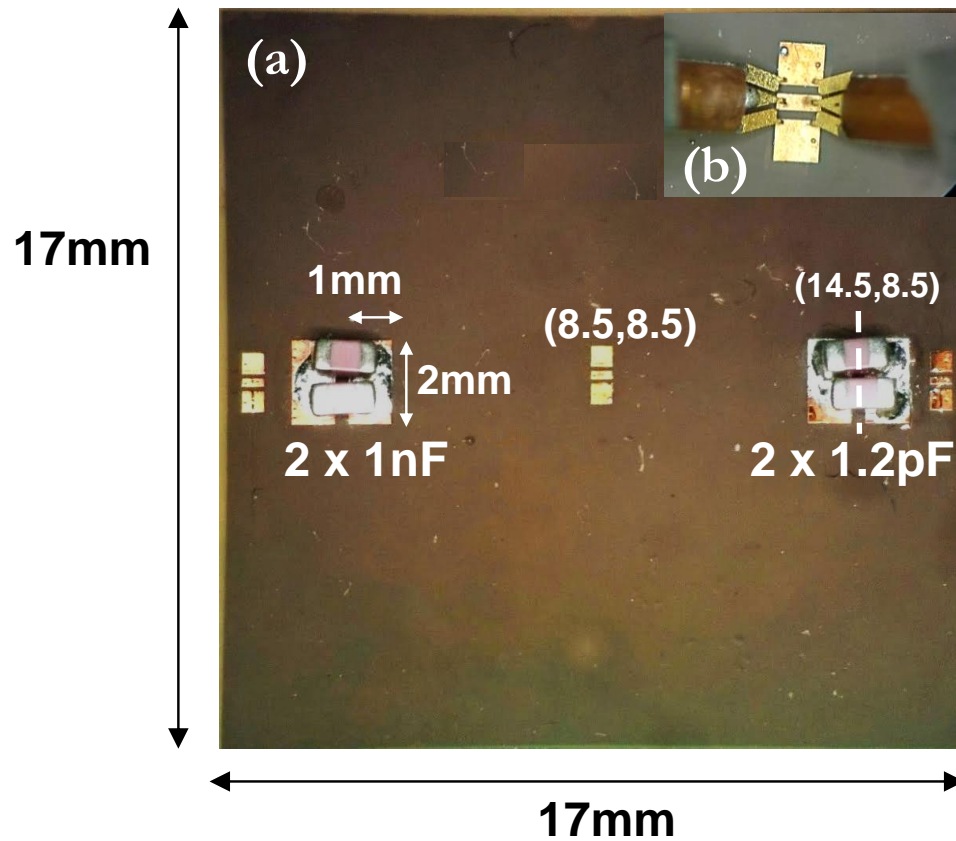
Decoupling capacitor placement on P/G planes (a) Top view and (b) probe arrangement
